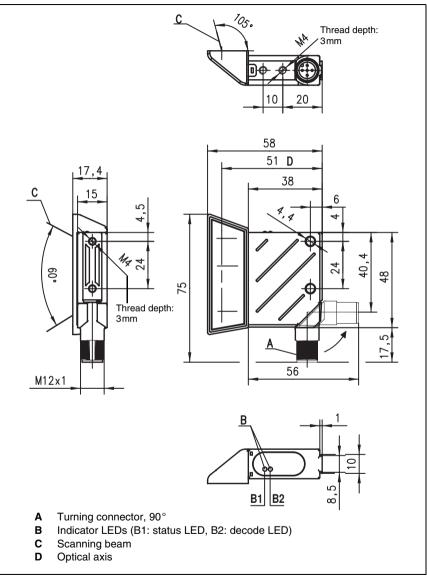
Dimensioned drawing BPS 8 SM 100-01
